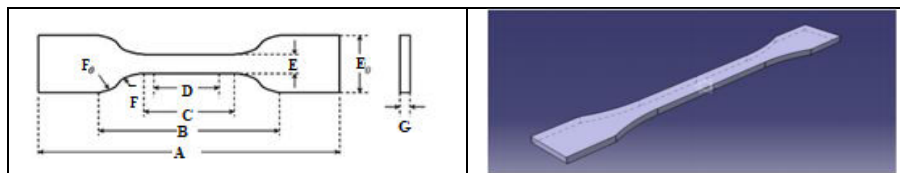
Shows ABS specimen dimensions and geometry by ASTM D638-03.
